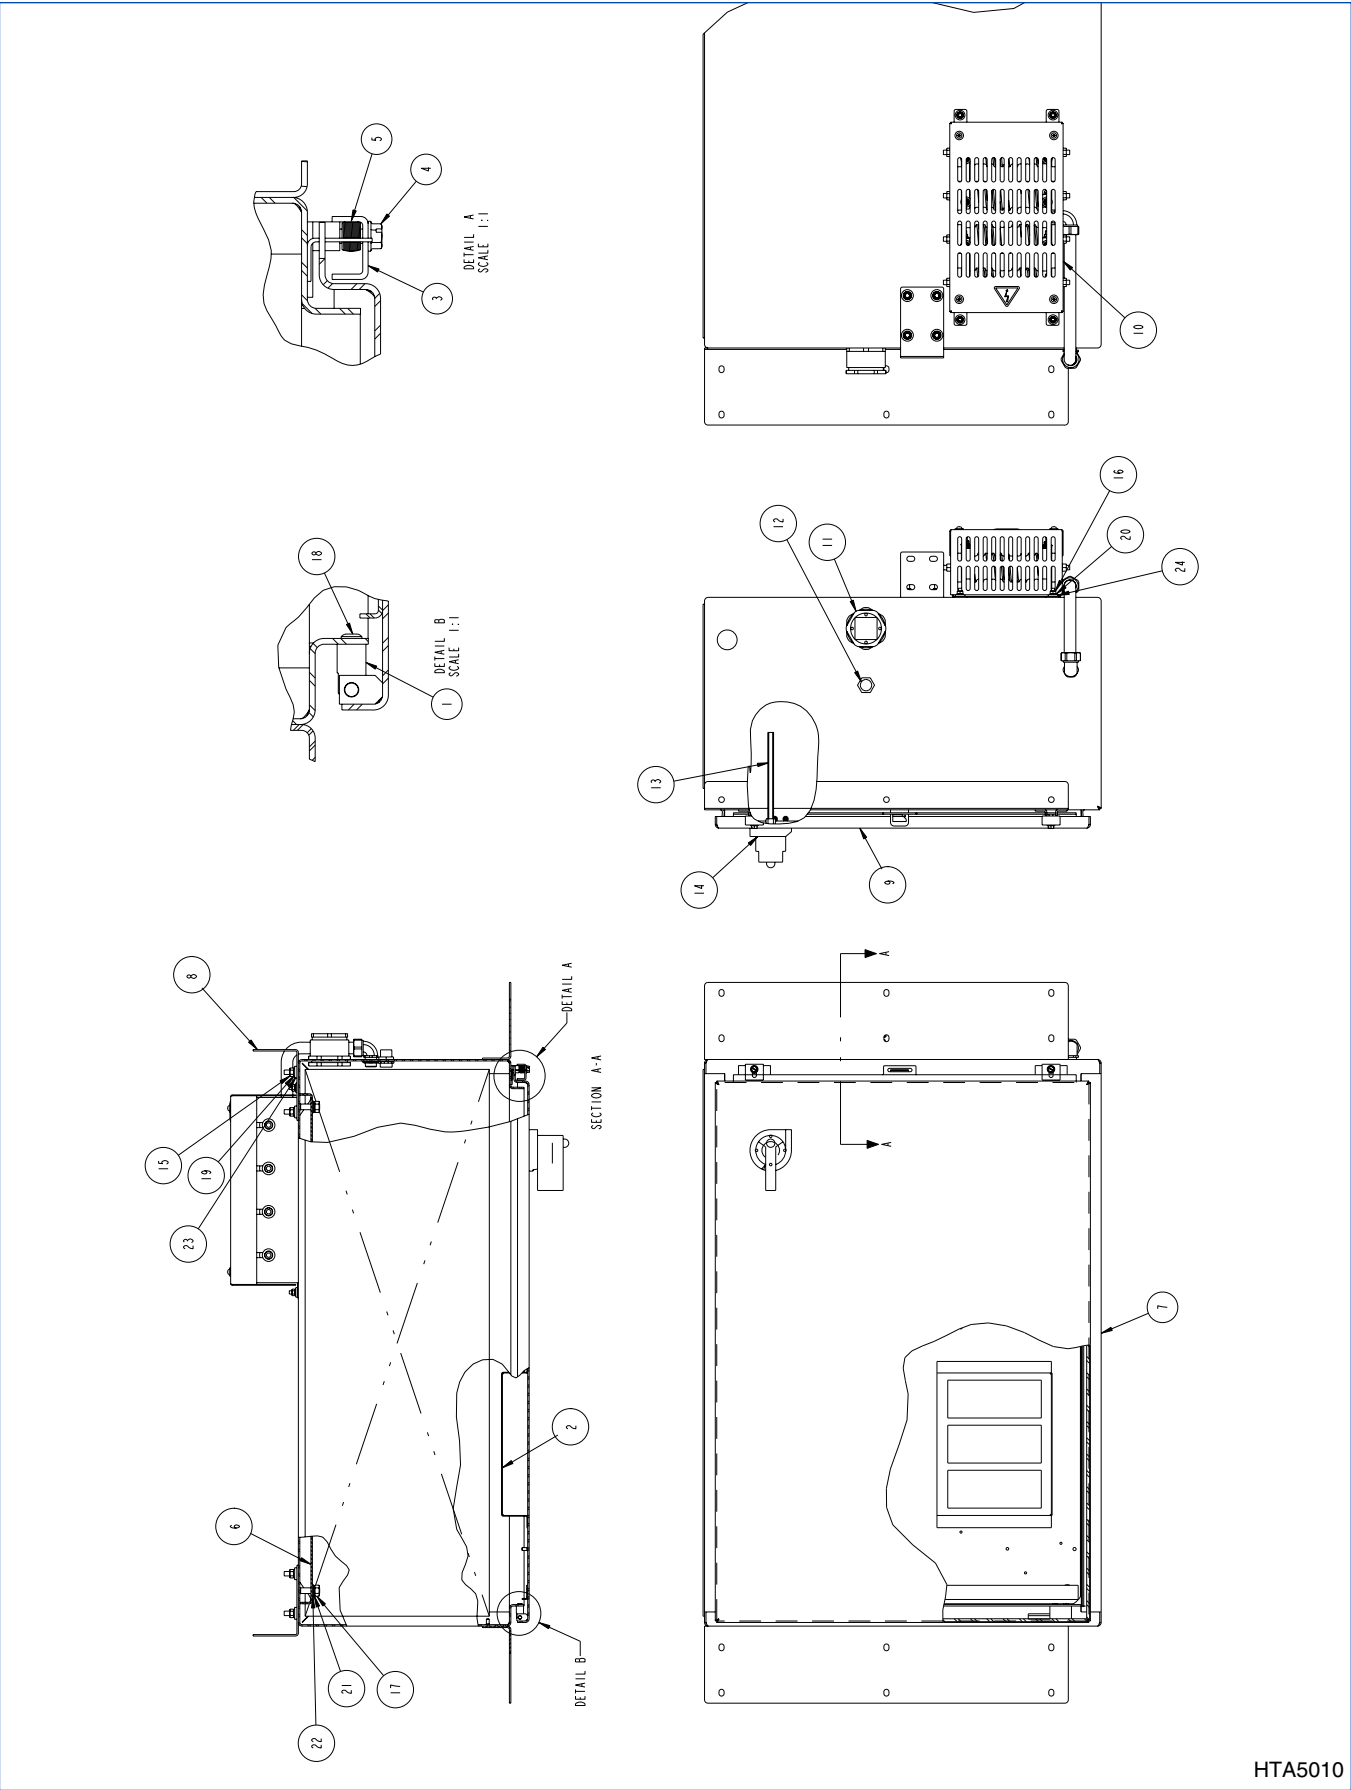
J – CONTROL PANEL SUPPORT ASSEMBLY
